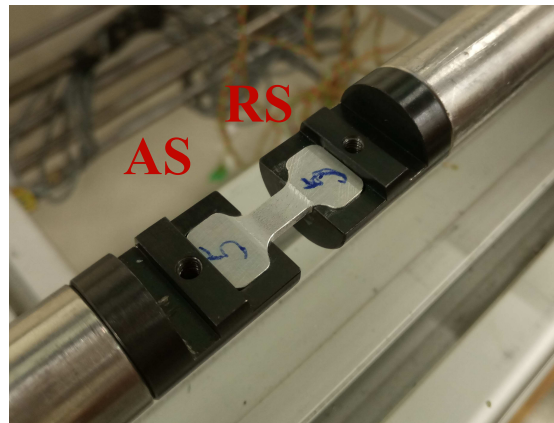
Butt joint specimen with the welding crosswise and its placement on the grips, positioned with the AS to the incident bar
